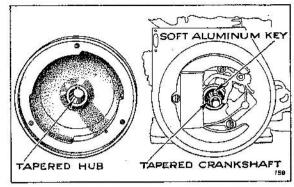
MAGNETO FLYWHEEL AND CRANKSHAFT TAPER
